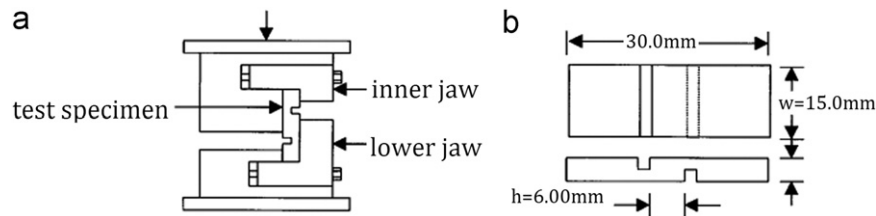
(a) Schematic illustration of an ILSS test fixture and (b) Test specimen geometry.
